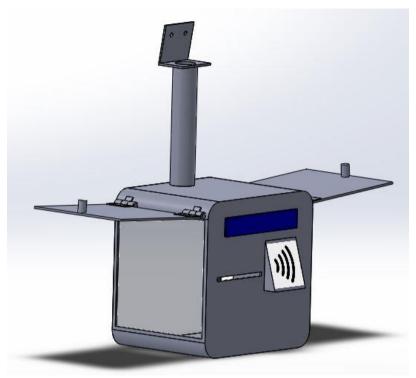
Isometric View With Open Side Doors of the Solidworks Model
